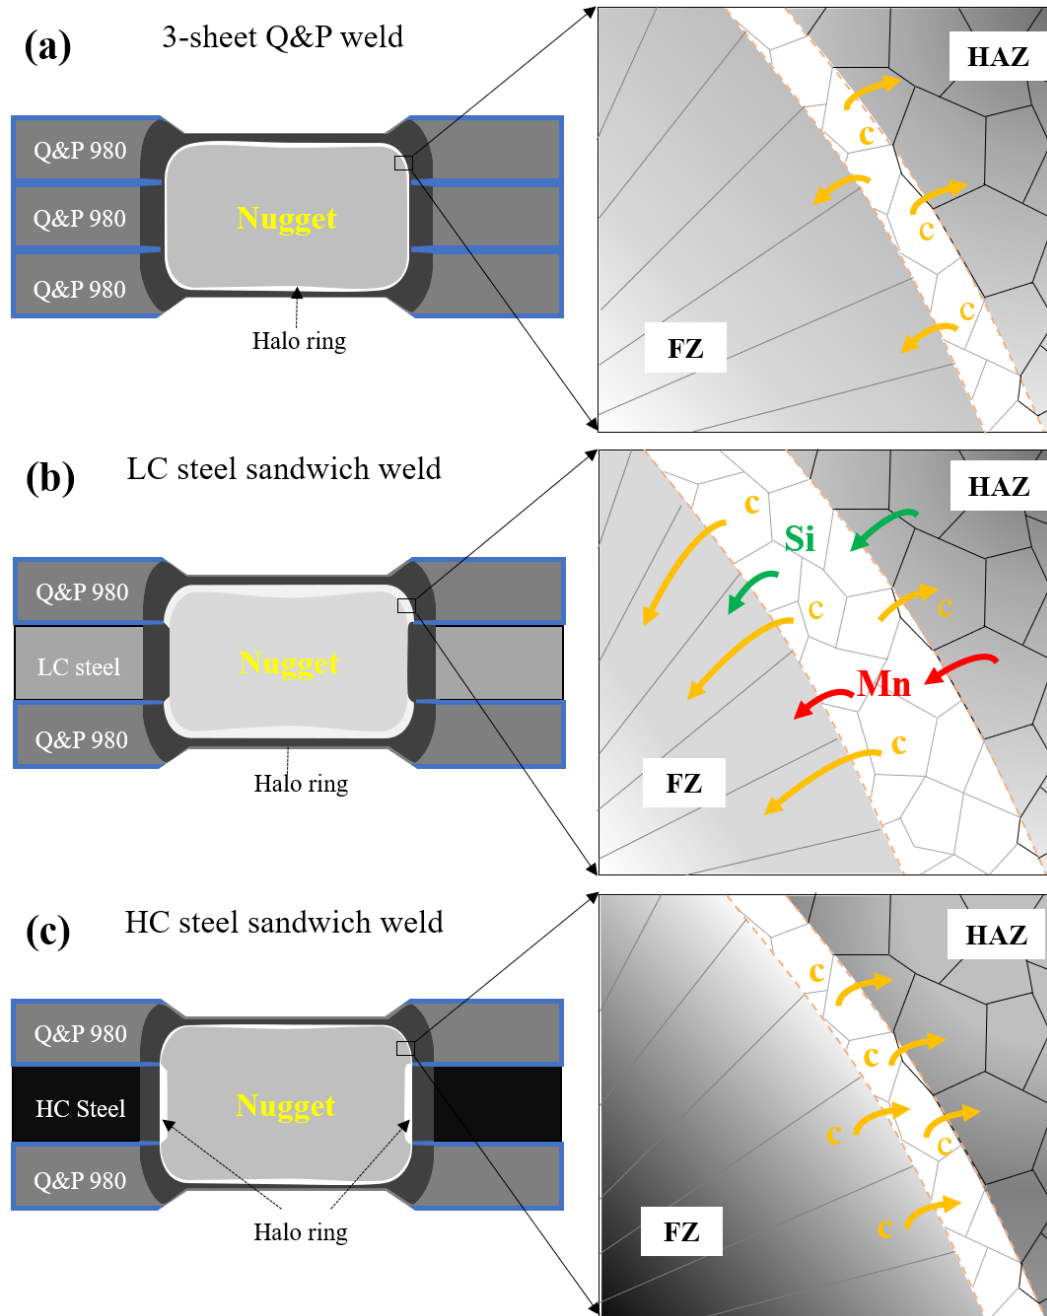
Schematic diagram showing the diffusion of C, Mn, and Si in (a) 3 sheet Q&P weld, (b) LC steel sandwich weld, and (c) HC steel sandwich weld.
